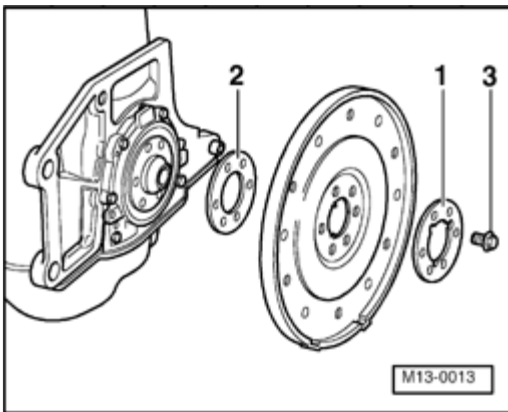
Identifying Washer With Recesses, New Bolts & Shim
